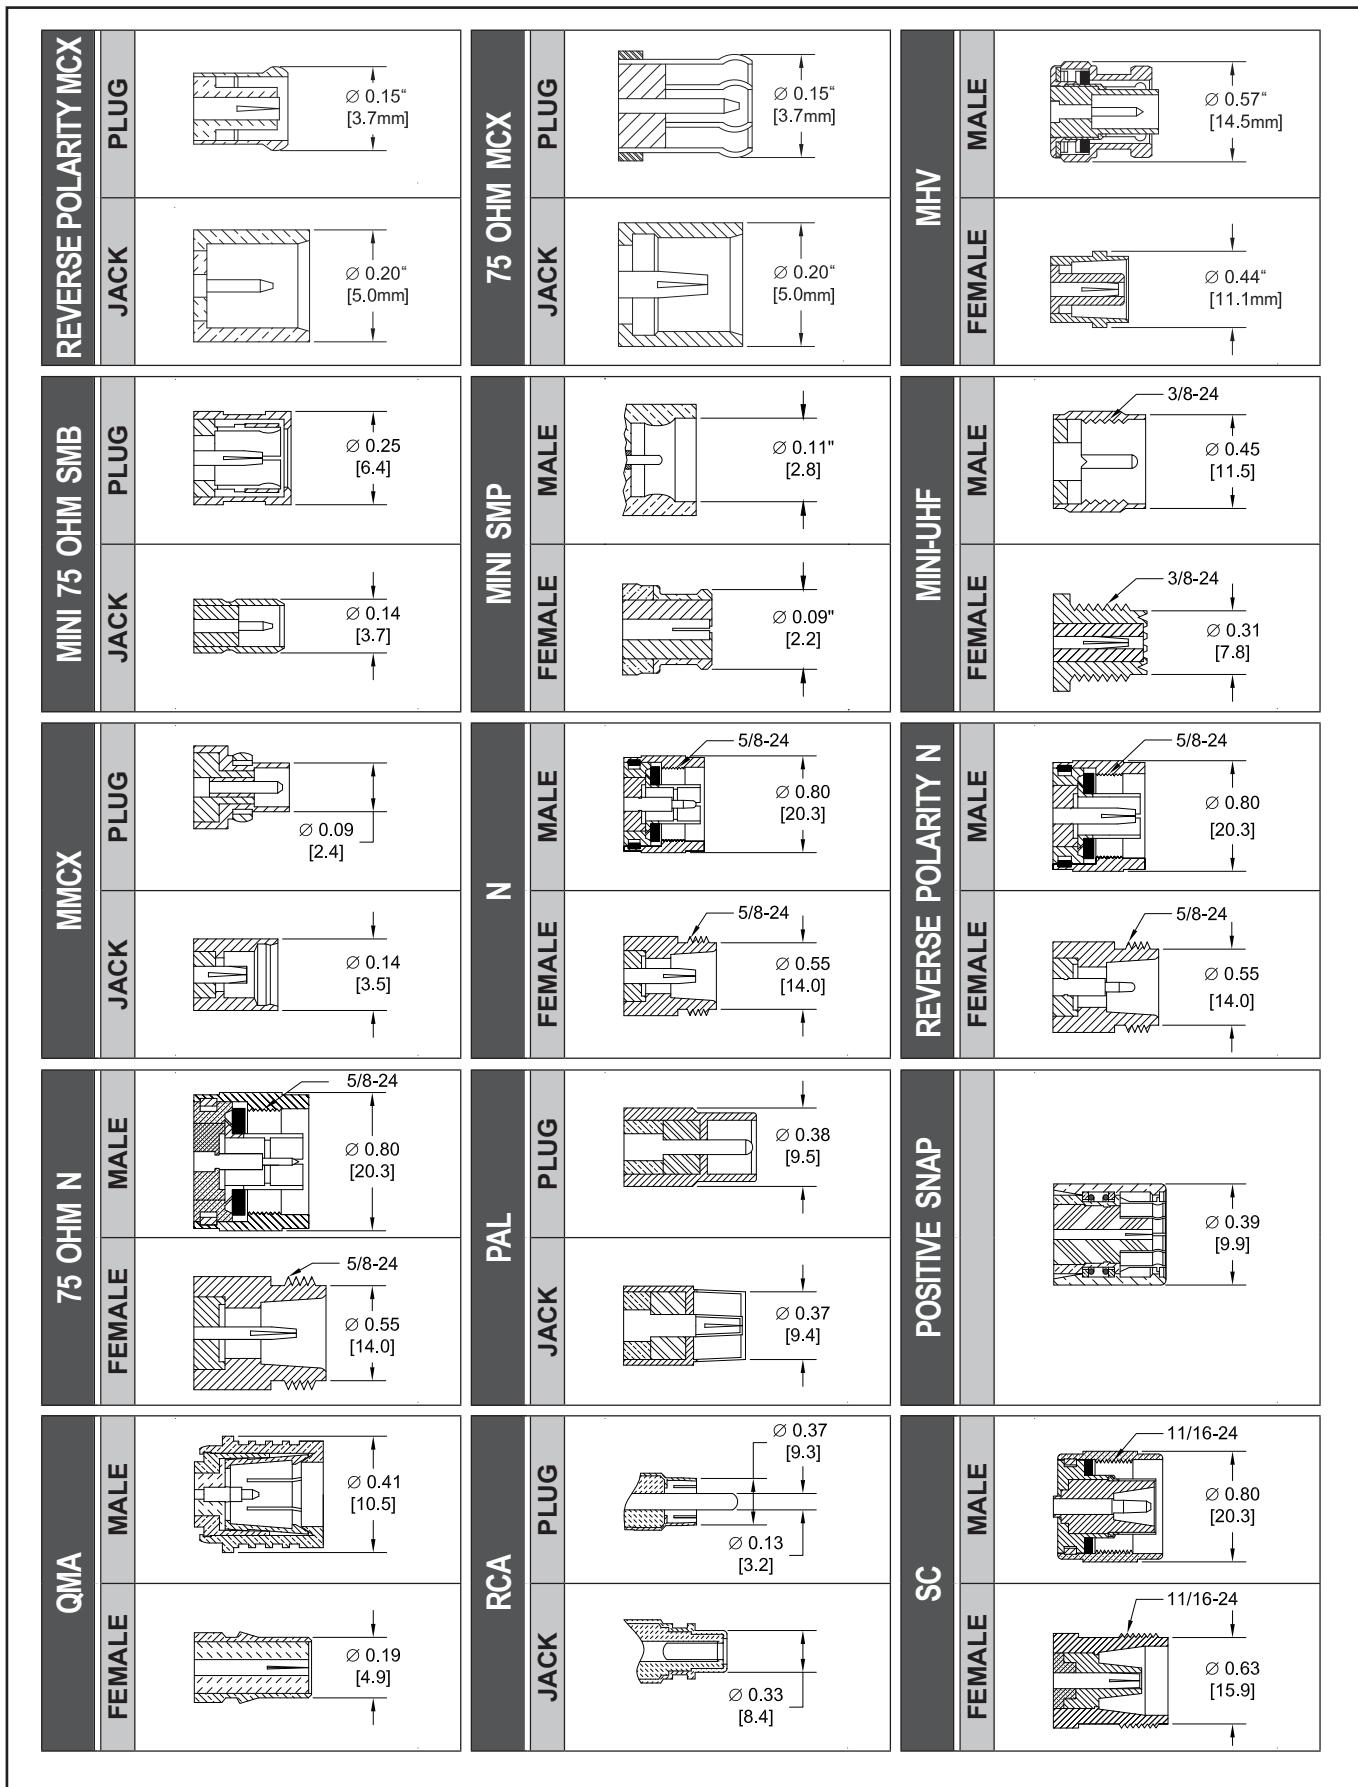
C – Connector side views, set 3 of 4. (Courtesy of Pasternak)
